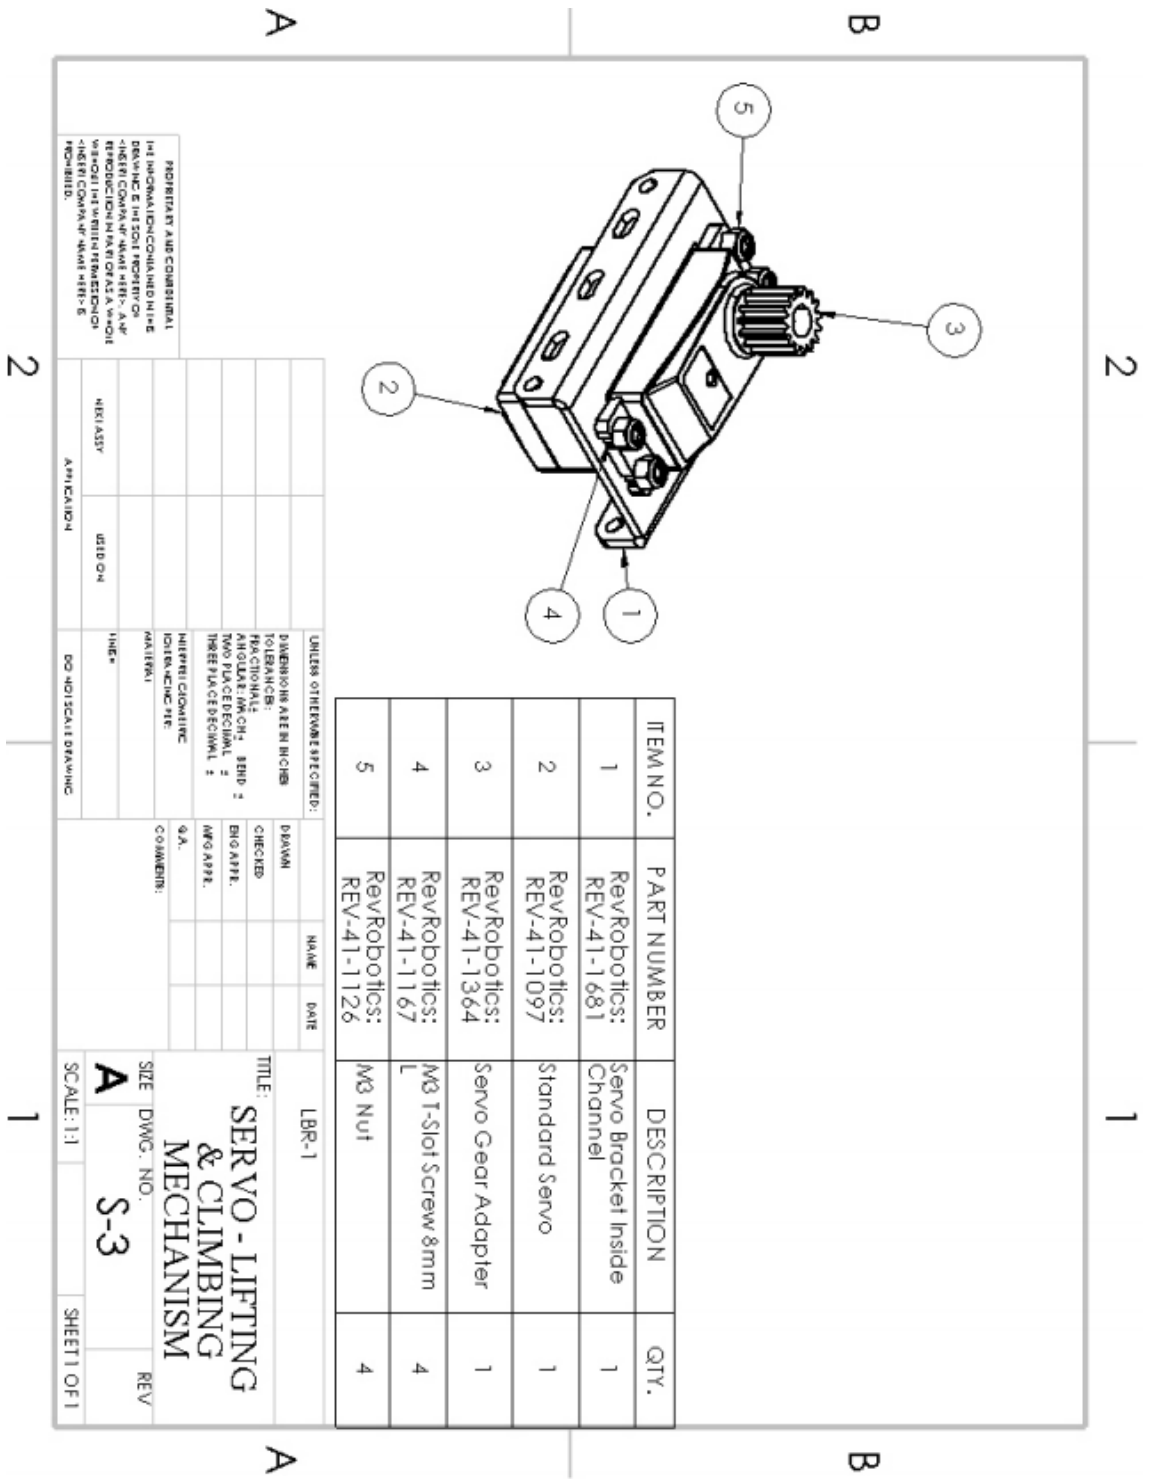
Assembly drawing of the servo assembly to control the lifting and climbing hook
